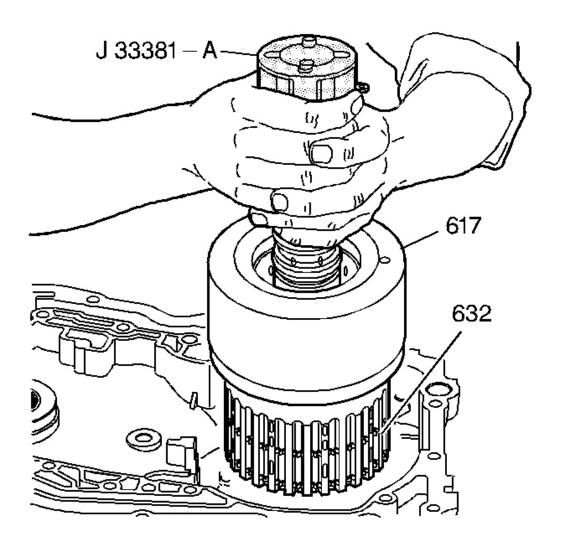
Installing J 33381-A Onto Input Clutch Housing Assembly Courtesy of GENERAL MOTORS CORP.
